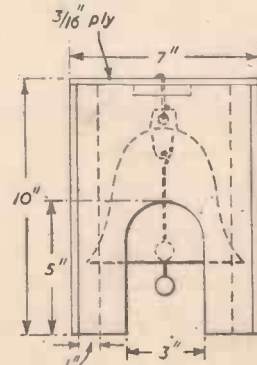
A side elevation of the bell hazard, showing construction details and dimensions.
